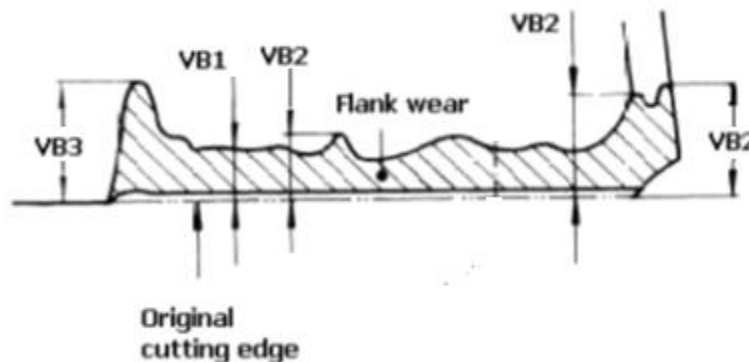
Tool wear land and different terms in the flank wear for an end mill cutter [2].
